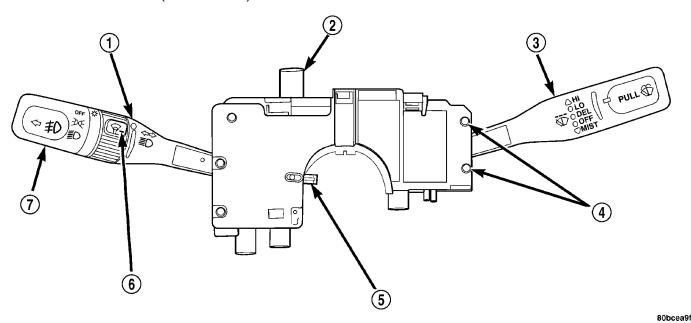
FRONT WINDSHIELD WIPER/WASHER SWITCH LOCATION
